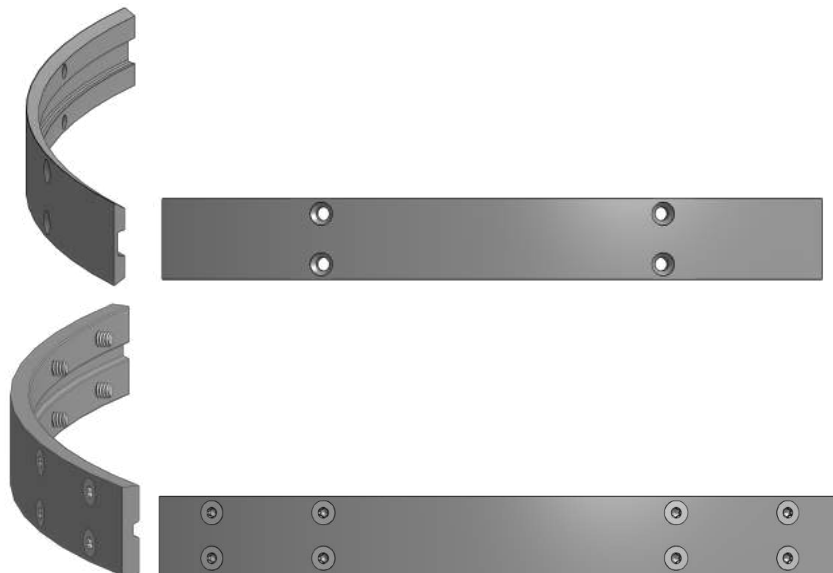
TOP: V1 standard arc clamps with holes to attach to the coupling rings. BOTTOM: V3 arc clamps with additional fastener holes, modified slot dimensions, and fasteners added.
